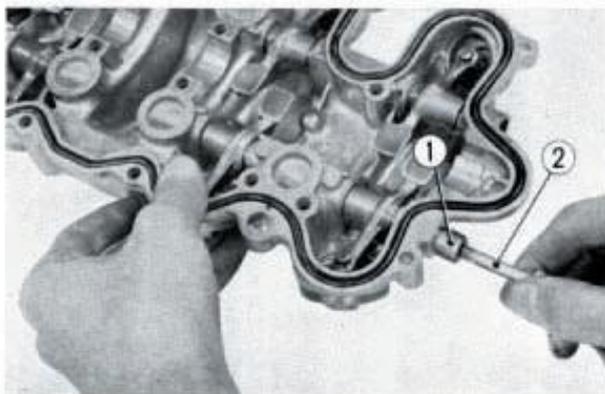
① Rocker arm shaft ② 6 mm bolt
